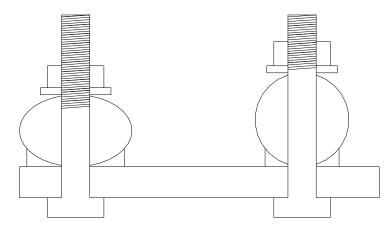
Left - WRONG - squashed tube, thread in tube. Right - RIGHT - tube still round, thread stops in washer(s).
